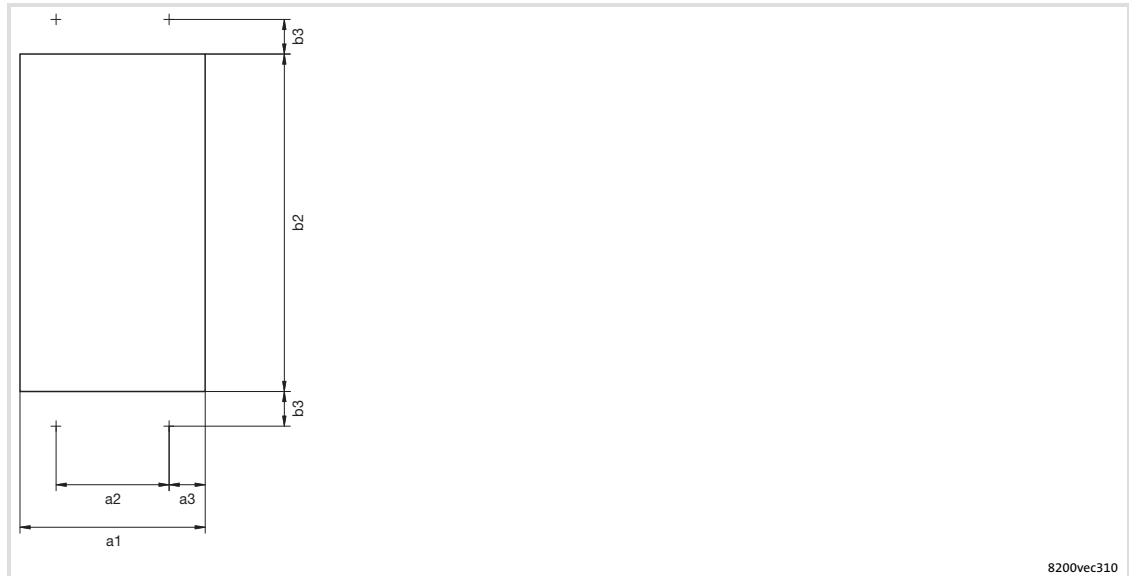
Dimensions for thermally separated mounting cutout 3 ... 11 kW
